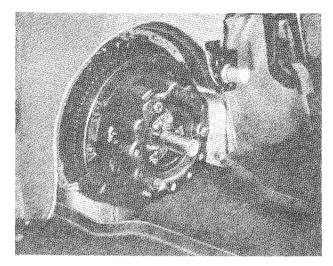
Aligning Clutch Floating Plate with Mandrel. Churchill Tool No. 20S. 72.
